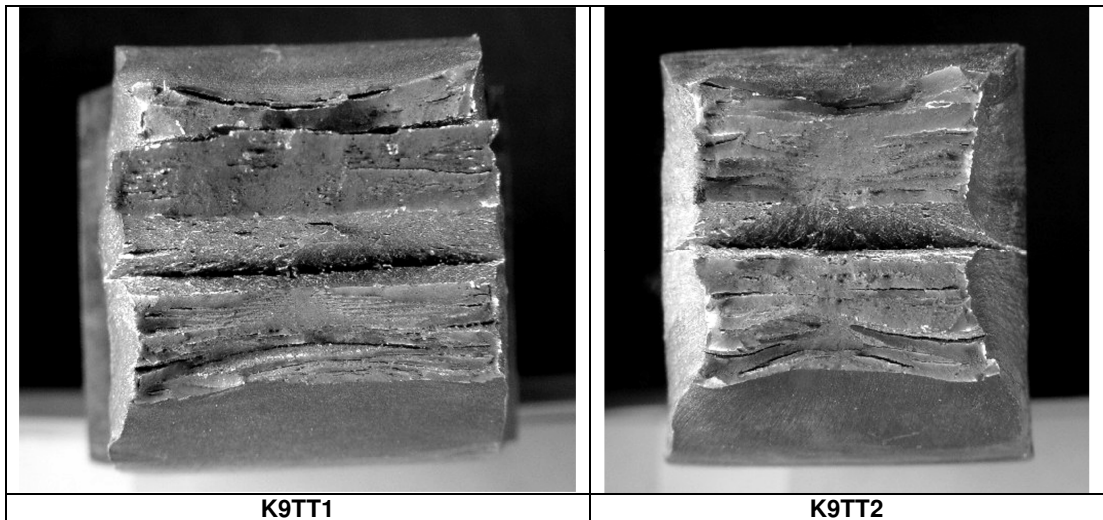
Fractographs of K9TT1 and K9TT2 specimens.
